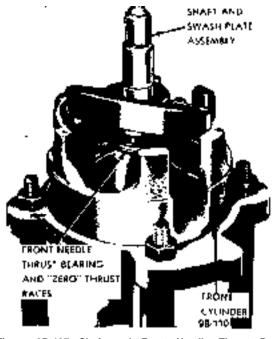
B-137 Shaft and Front Needle Thrust BE in Cylinder Half
